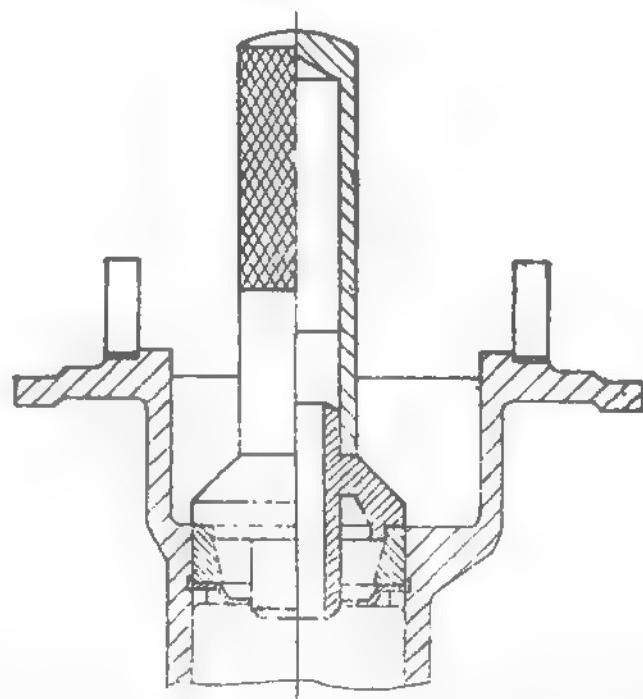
MOUNTING DRIVE PINION BEARING OUTER RACE, BY MEANS
